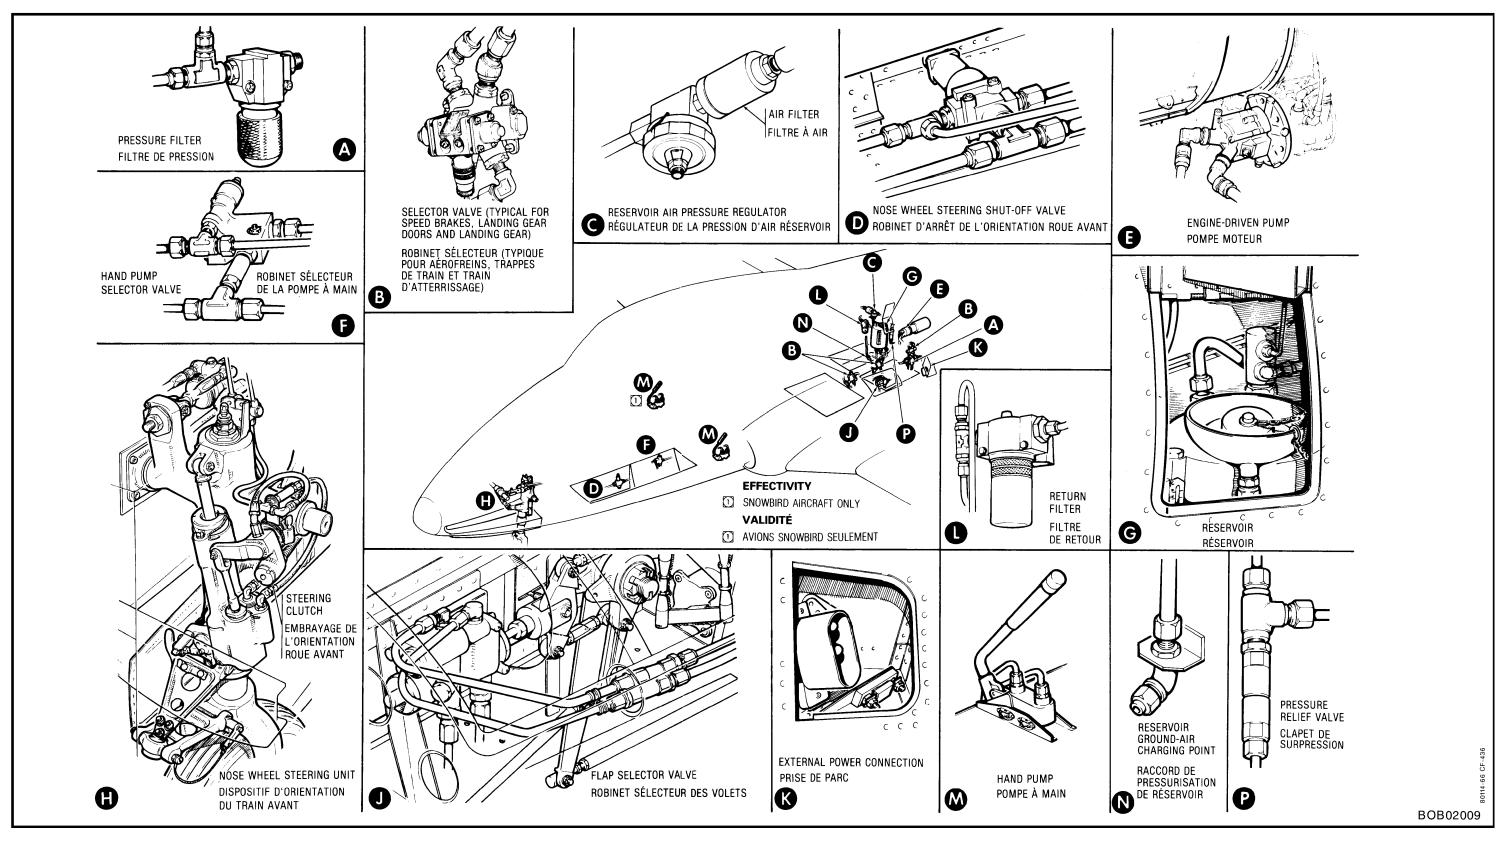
(Sheet 3 of 3) General Arrangement of Hydraulic System Figure 2-2 (feuille 3 de 3) Disposition générale des circuits hydrauliques
